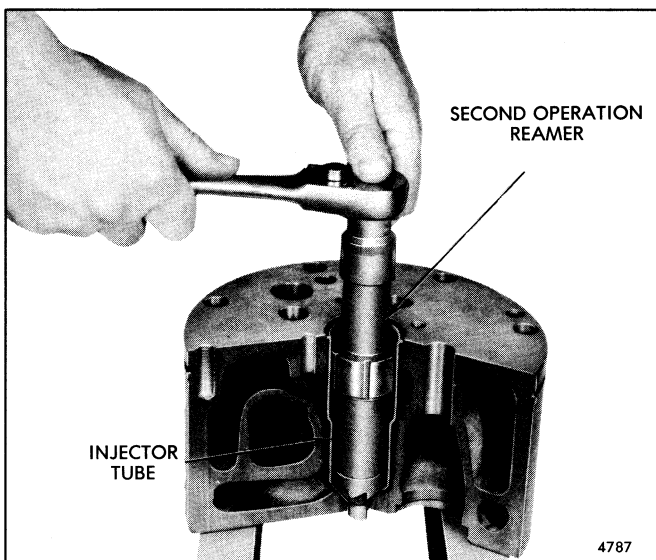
Reaming Injector Tube for Injector Nut with Tool J 22342-11
